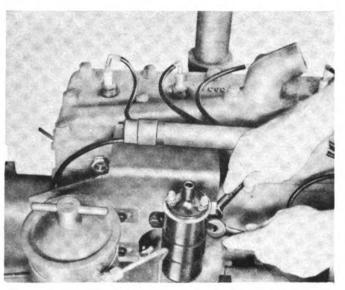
Removing Oil Filter, Coil and Bracket Assembly.
